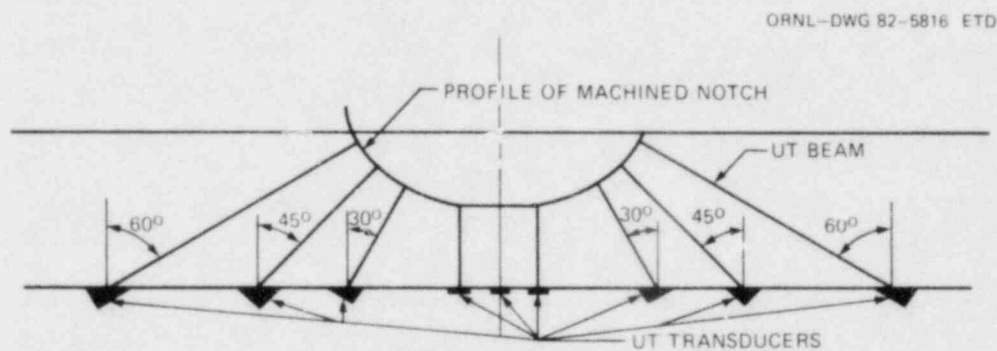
Sectional view of the profile of the V-8A machined notch with locations of ultrasonic (UT) transducers used to measure fatigue crack growth.
